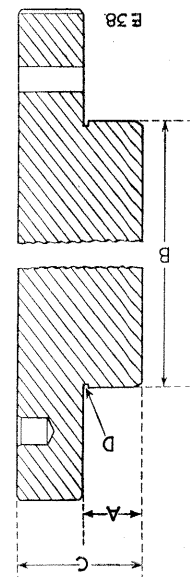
Machining flywheel for ring gear (Diesel models)
